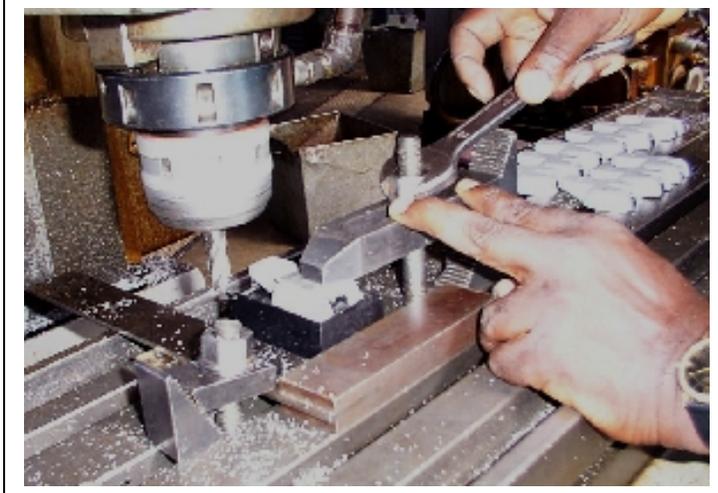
A vertical milling machine can also be used as shown. Ensure that the root is machined exactly parallel to the splitter by clamping each bucket in the same position.
